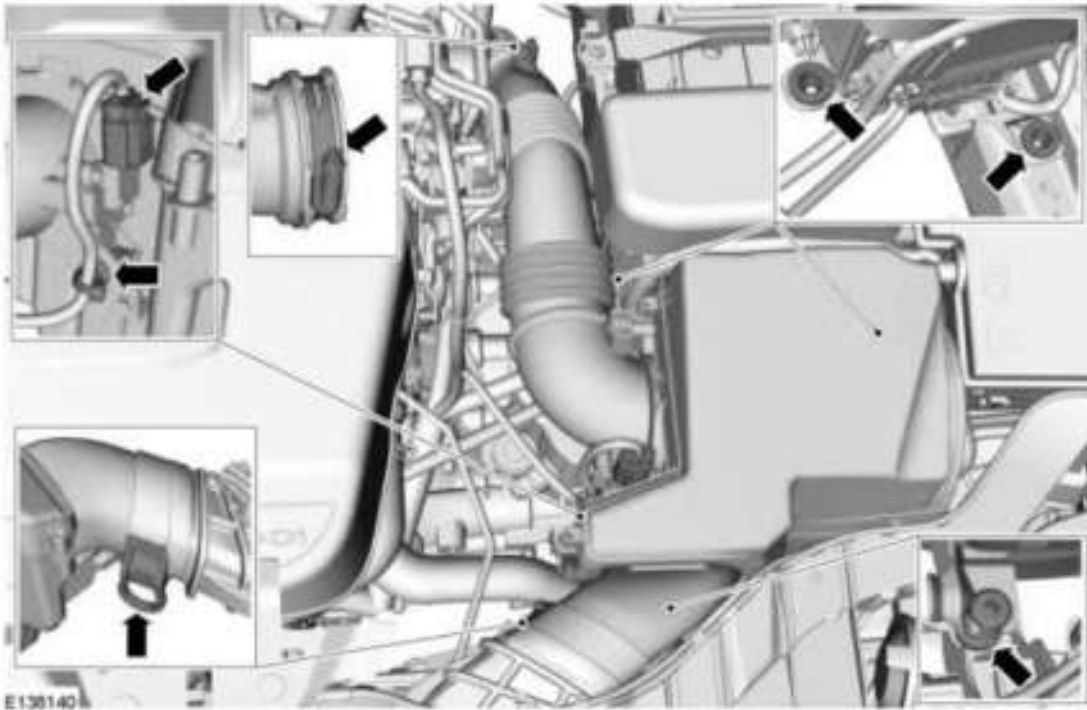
Locating Selector Cable Connector And Bracket Bolt
